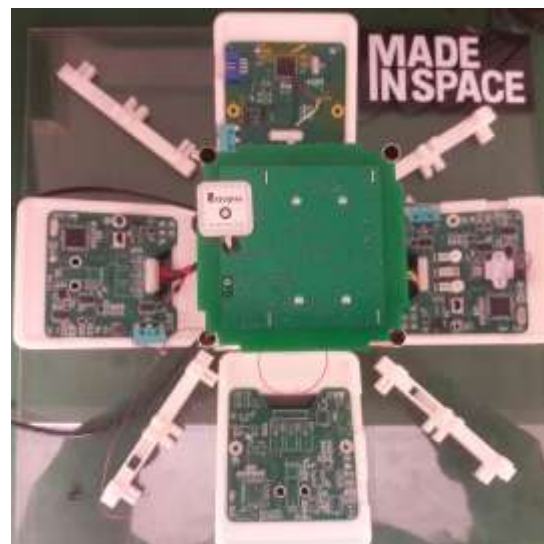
MakerSat-1 PC board "flower-petal" configuration ready for shipment to ISS and easy snap-together assembly.
